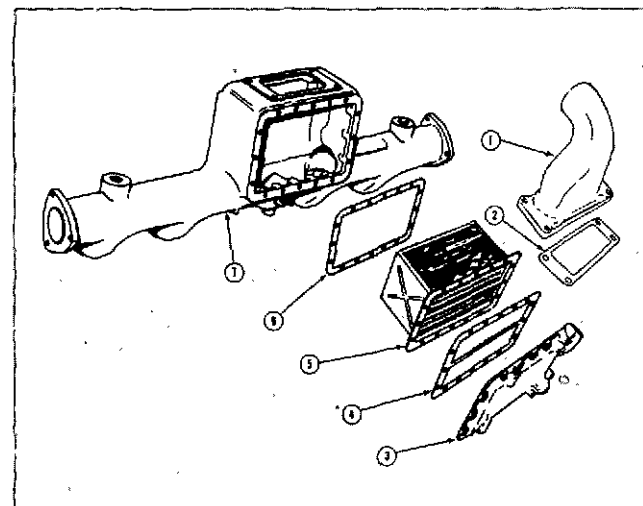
, V40819. Intake manifold with inter-cooler
